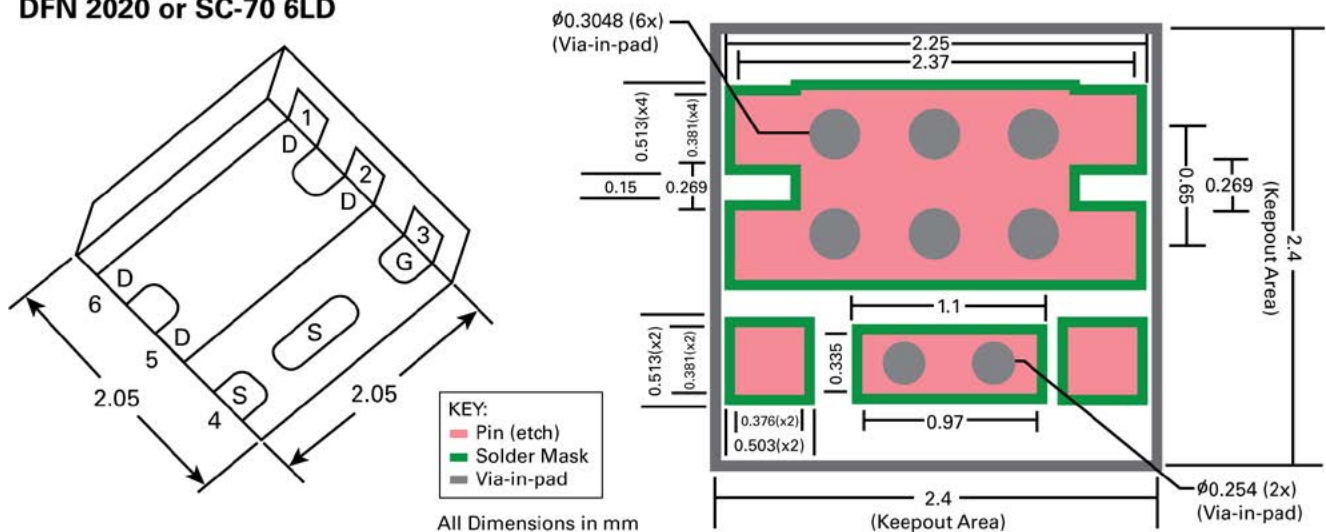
DFN 2x2 mm 6 LEAD (SC-70 6LD) single transistor package.
